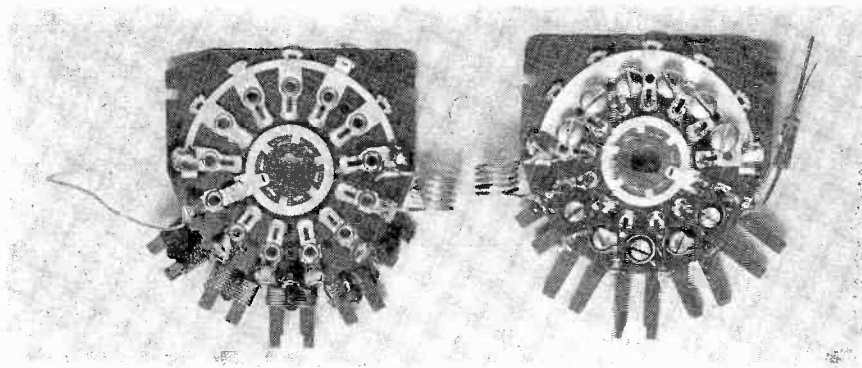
Switch wafers used in RCA tuner, showing mounting of coils and straps.
